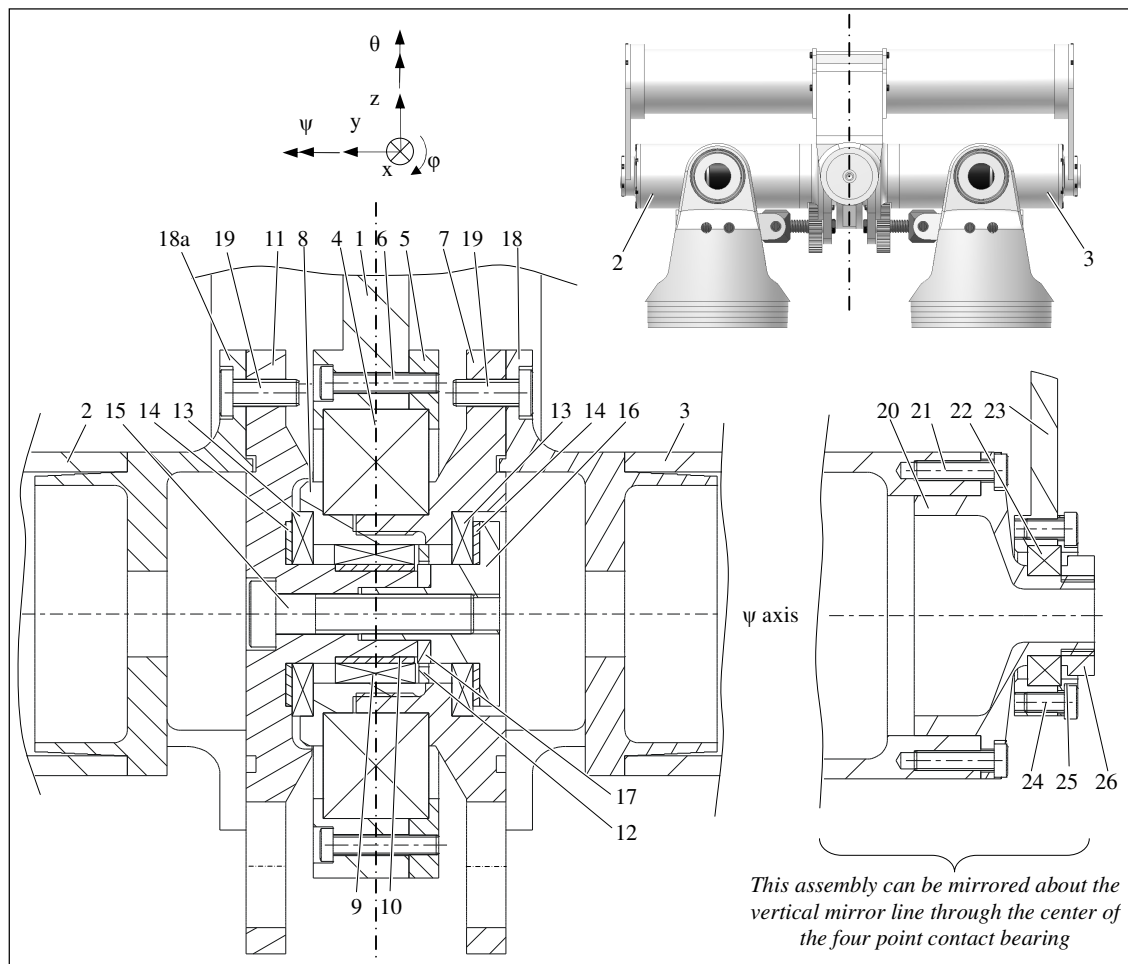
Posterior view and a section view of the waist and the hip  $\psi$  joint construction: waist (1),  $\psi$ -tube left (2),  $\psi$ -tube right (3), four point contact bearing (4), retaining ring (5), M3 bolts (6), bearing flange right (7), bearing cap right (8), drawn cup needle roller bearing with open ends (9), bush (10), bearing flange left (11), retaining ring (12), axial needle roller bearings (13), axial bearing washers (14), M6 bolt (15), bearing cap left (16), distance ring (17),  $\phi$ -motor brackets (18,18a), M4 bolts (19), outside bearing flange (20), M3 bolts (21), deep groove ball bearing (22), end plate (23) M3 bolts (24), retaining ring (25), retaining nut (26). Note that the hip  $\psi$  and hip  $\phi$  actuations are left out in the section view.
